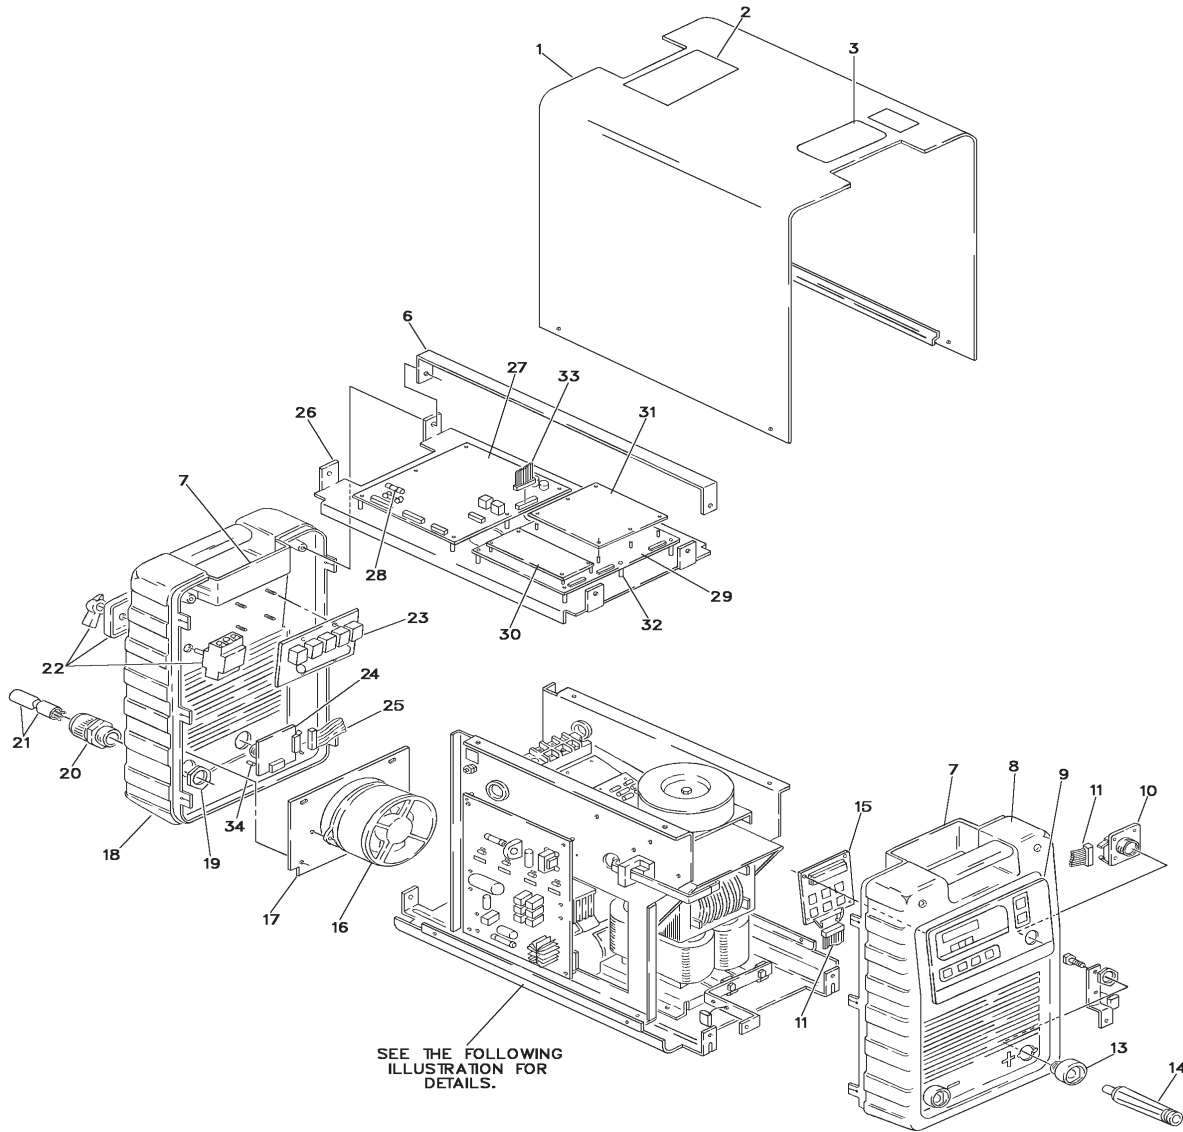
Ultra Flex<sup>®</sup> Welder Assembly
